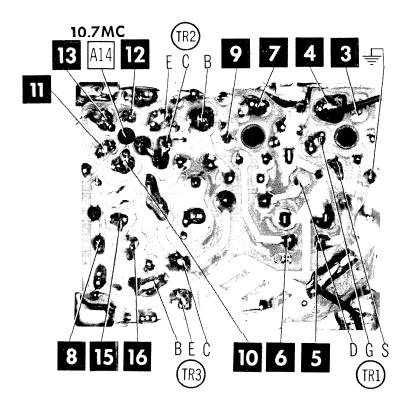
Tuner Chassis Bottom View — CircuiTrace Points.
